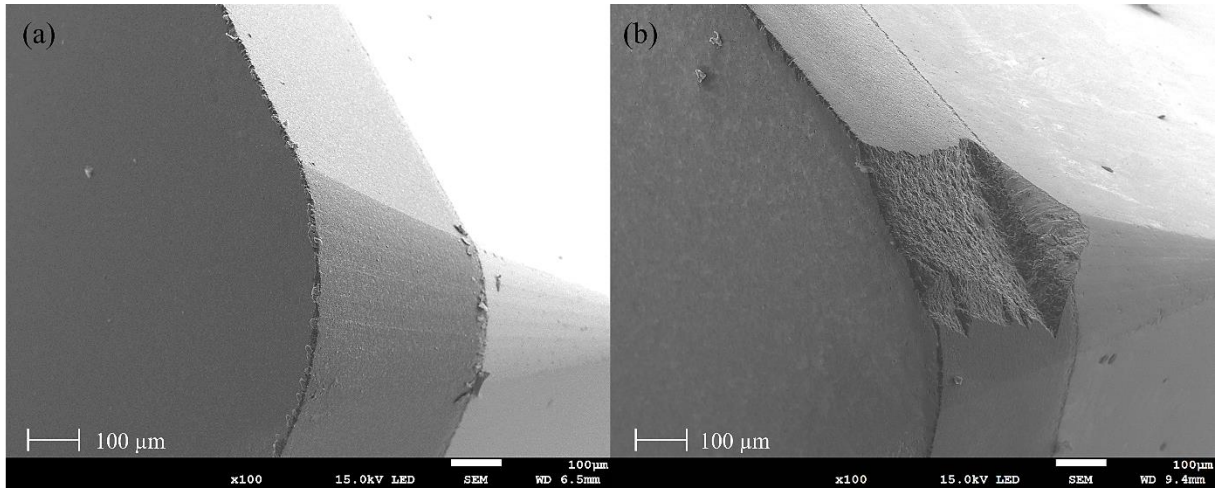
Cutting edge comparison of PCD diamond brazed cutting tools after machining two grade types of aluminum workpiece materials. (a) Machining of 6082-grade aluminum. (b) Machining of Alumelec 89 grade aluminum.
